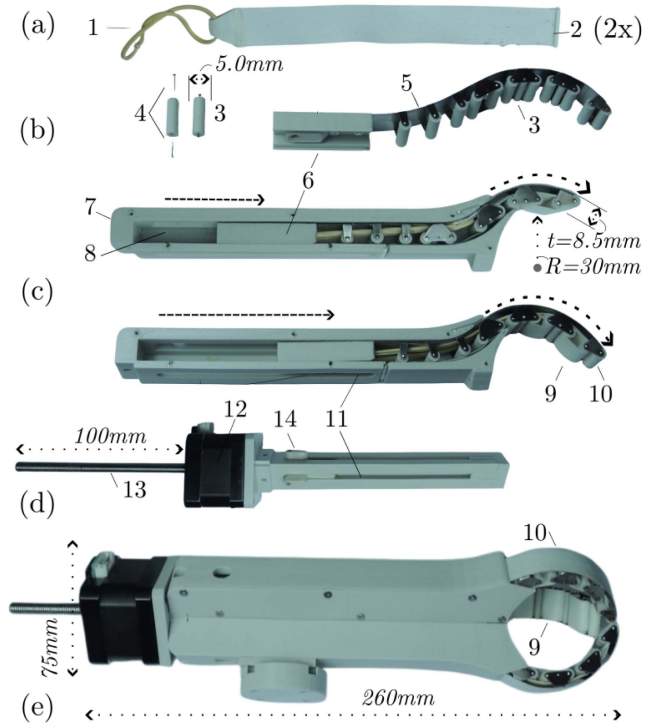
Prototype of the DBCF-EM gripper during assembly. From top to bottom: (a,b) finger components, (c) the finger module in partially and fully grasped states, (d) the central hub, and (e) the assembled gripper.
